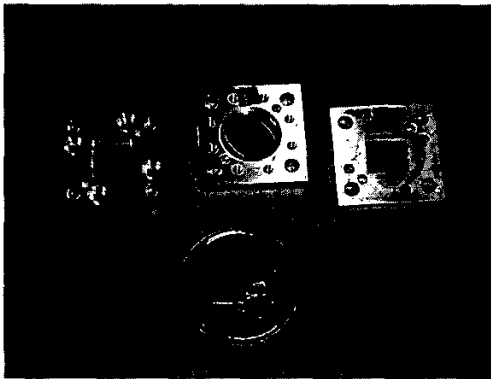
Photograph of the internal pieces of the 90° twist prototype shown in Fig. 4.
